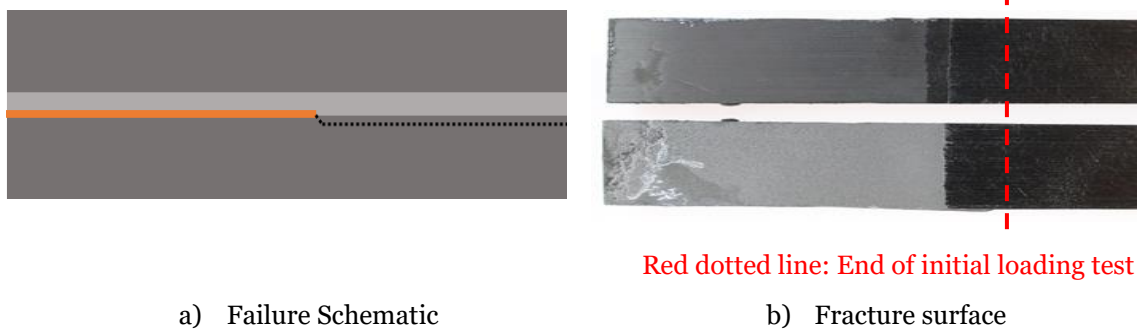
Failure schematic and fracture surfaces for 0.2mm DCB specimens at RTD conditions
